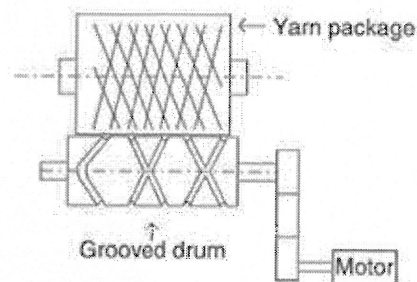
Schematic of a head of a yarn bobbin winder machine.
